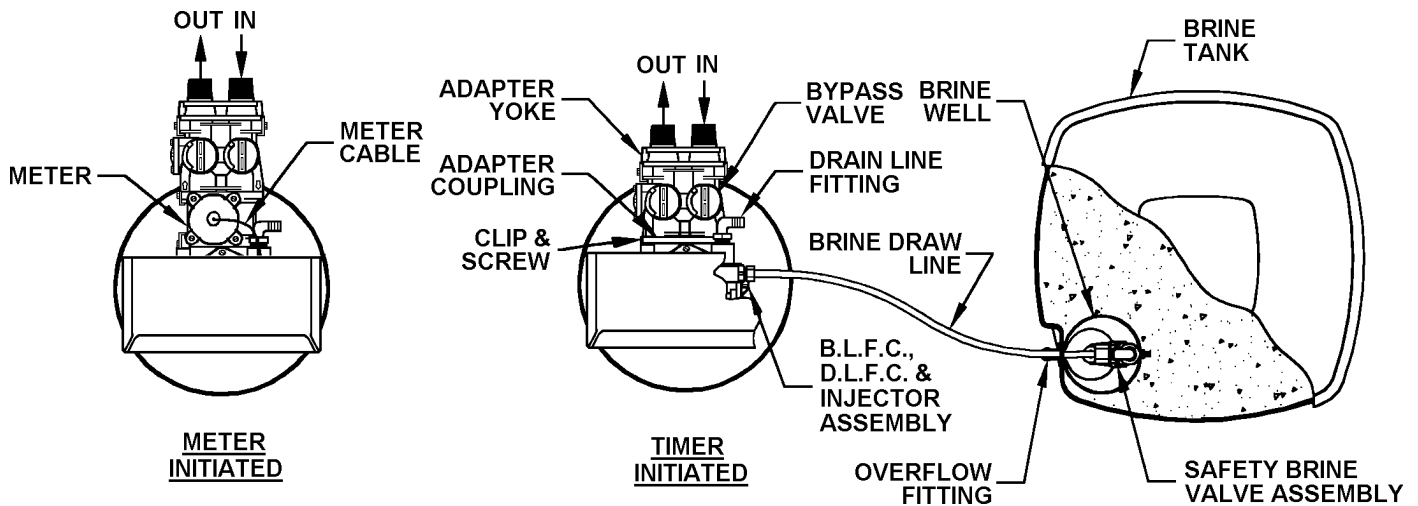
SOFTENER AND BRINE TANK ASSEMBLY, TOP VIEW
